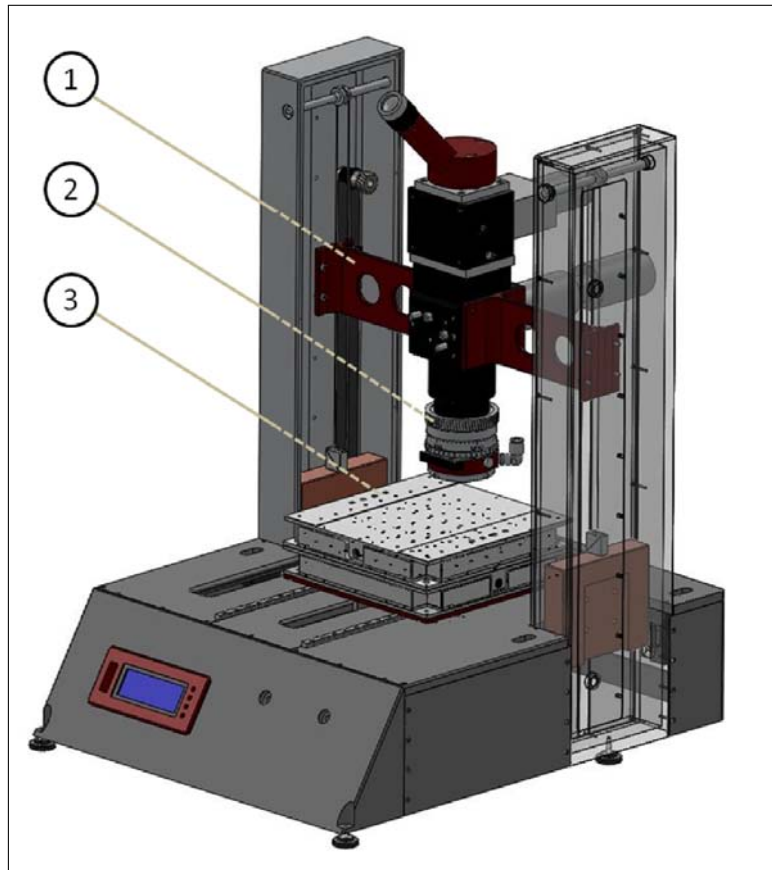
Illustration of Laser Machining Unit: Vertical Adjustment Sled ①, Laser Head ②, Robotic Manipulator ③
